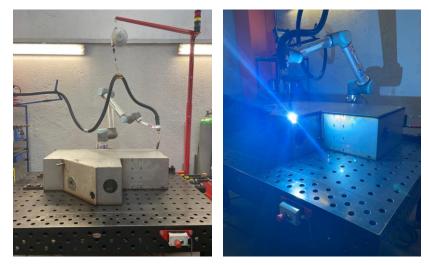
and 6: Workplace for collaborative robot welding at the SME from case study 2
